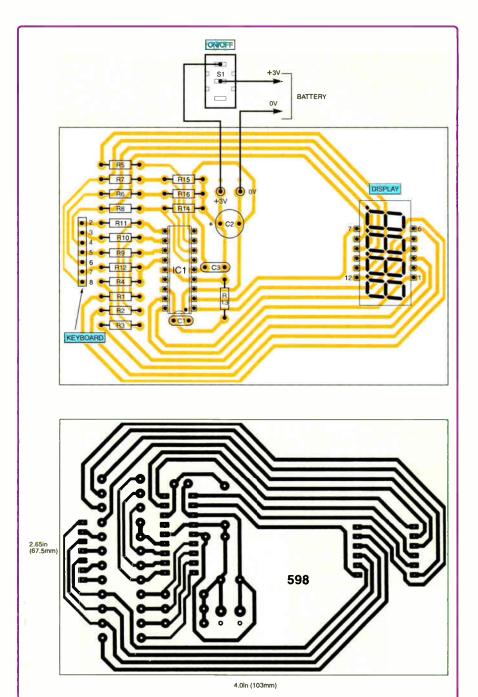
Mind Trainer printed circuit board component layout, full size copper foil master and wiring to the On/Off battery supply switch. Note that keypad pins/pads 1 and 9 are not connected to the board. Use an IC socket for the PIC
